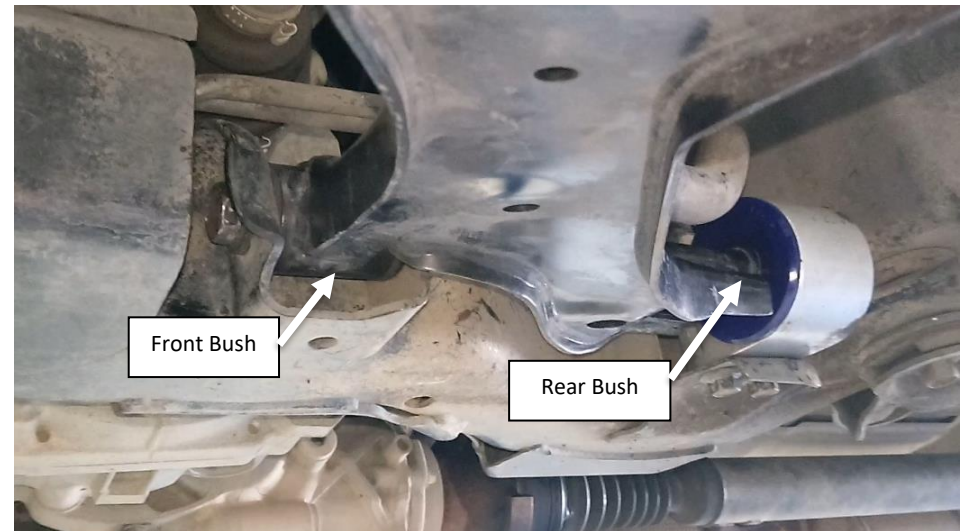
View from underneath of the vehicle - Left Hand Side Control Arm assembly installed
